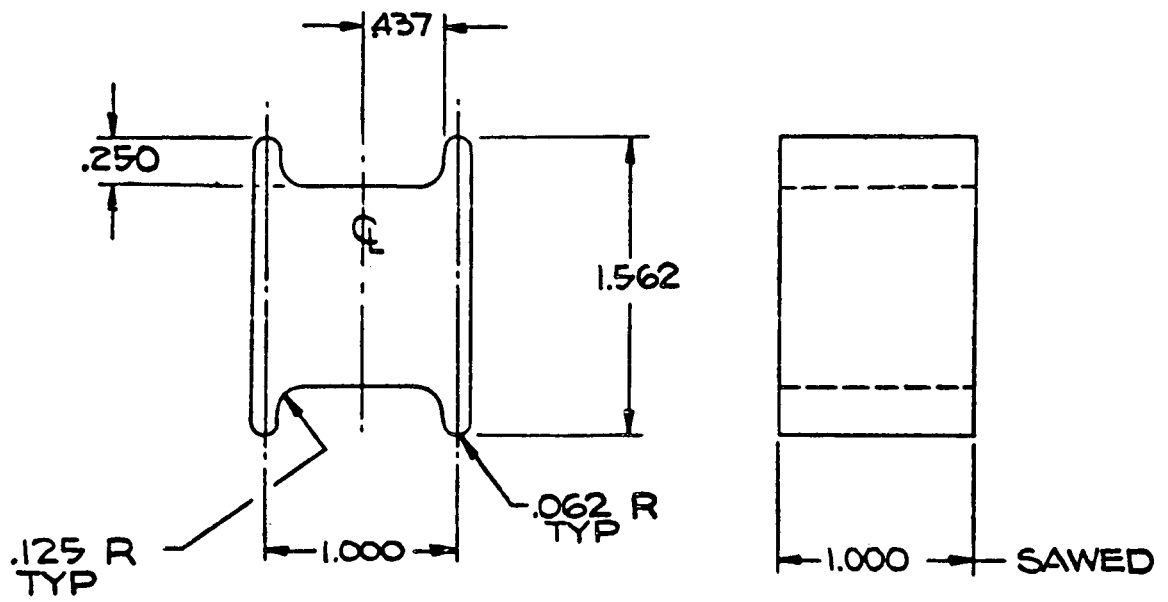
B. H FIXTURE FOR BENT BEAM STRESS CORROSION ASSEMBLY
